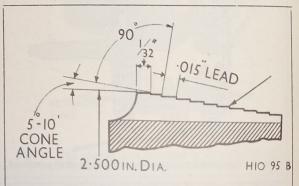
Cone course turned either right- or left-hand. The arrow, top right, indicates a section of the cone showing machining details, but with the course turning drawn to larger scale.
